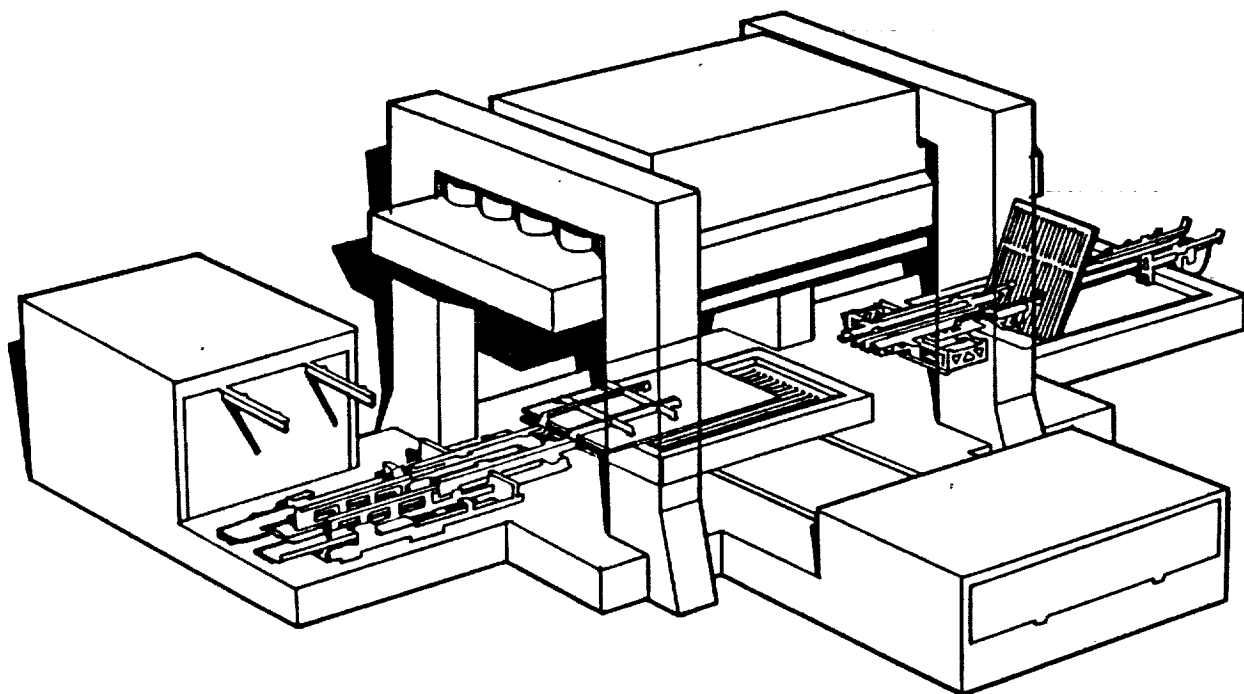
Hot Loading of Blank and Quench of Formed Part.
